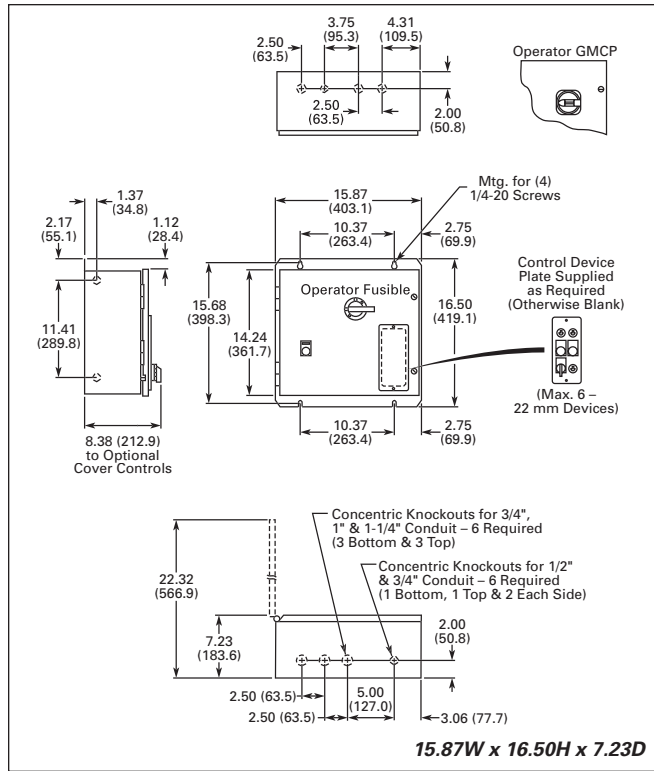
Box L ② — Approximate Dimensions in Inches (mm)
